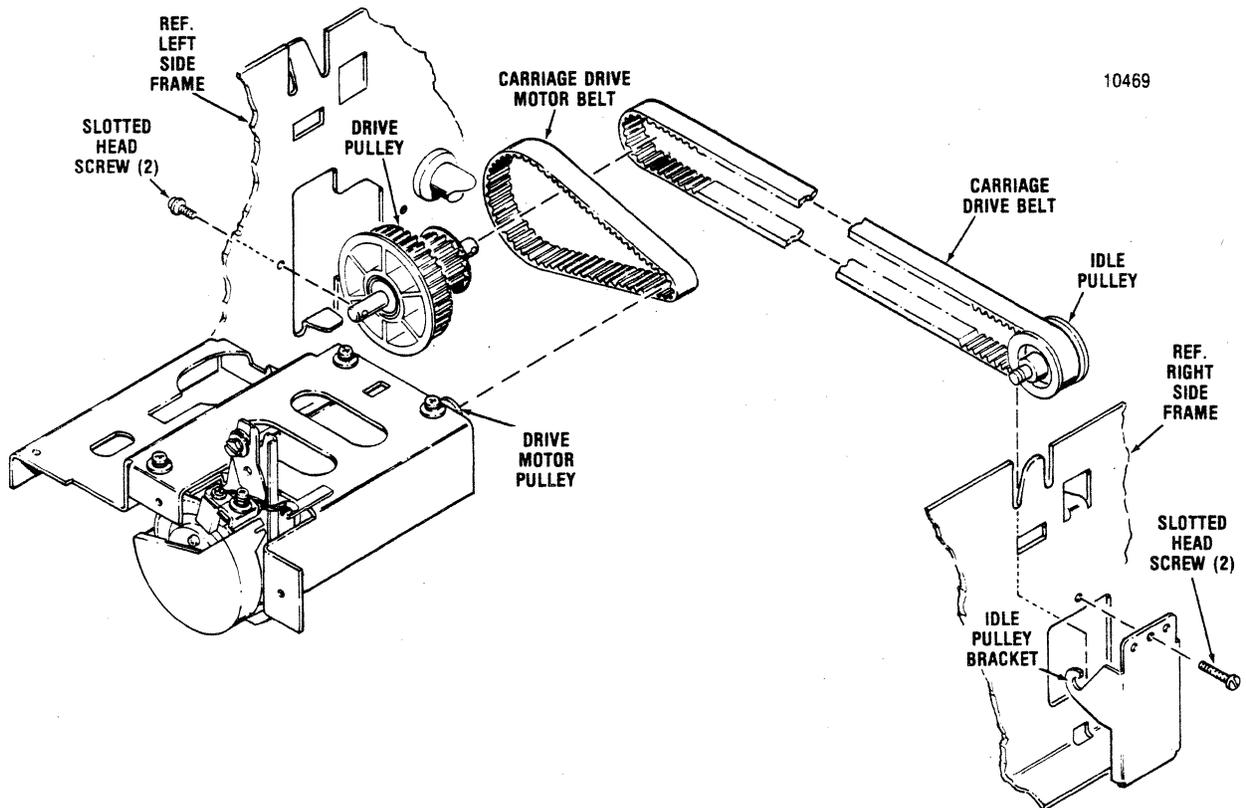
Removal/Replacement, Carriage Drive Motor Belt, Carriage Drive Belt
